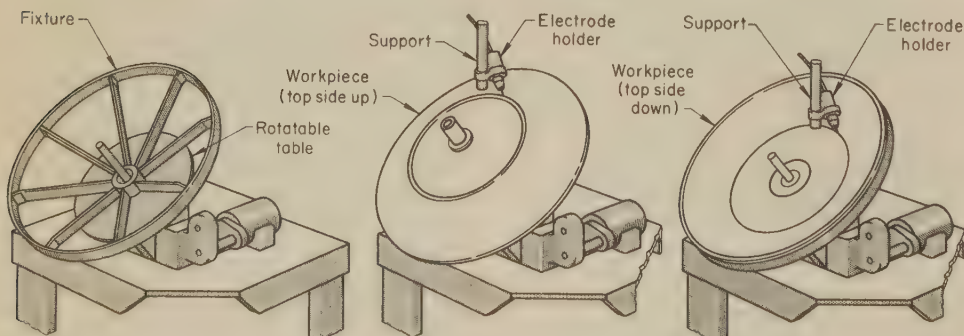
Rotary positioner that can be used for welding two sides of a workpiece, with either a manually held or (as shown) a mechanically held electrode holder
